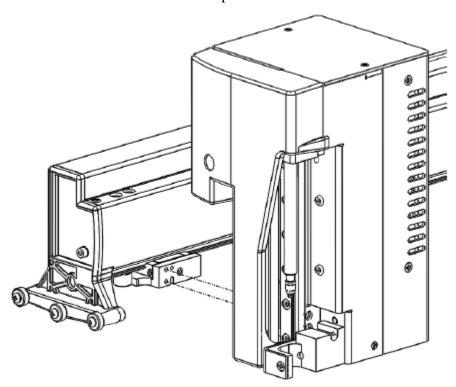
Sample Pipettor Z Drive Attachment to Y Drive
